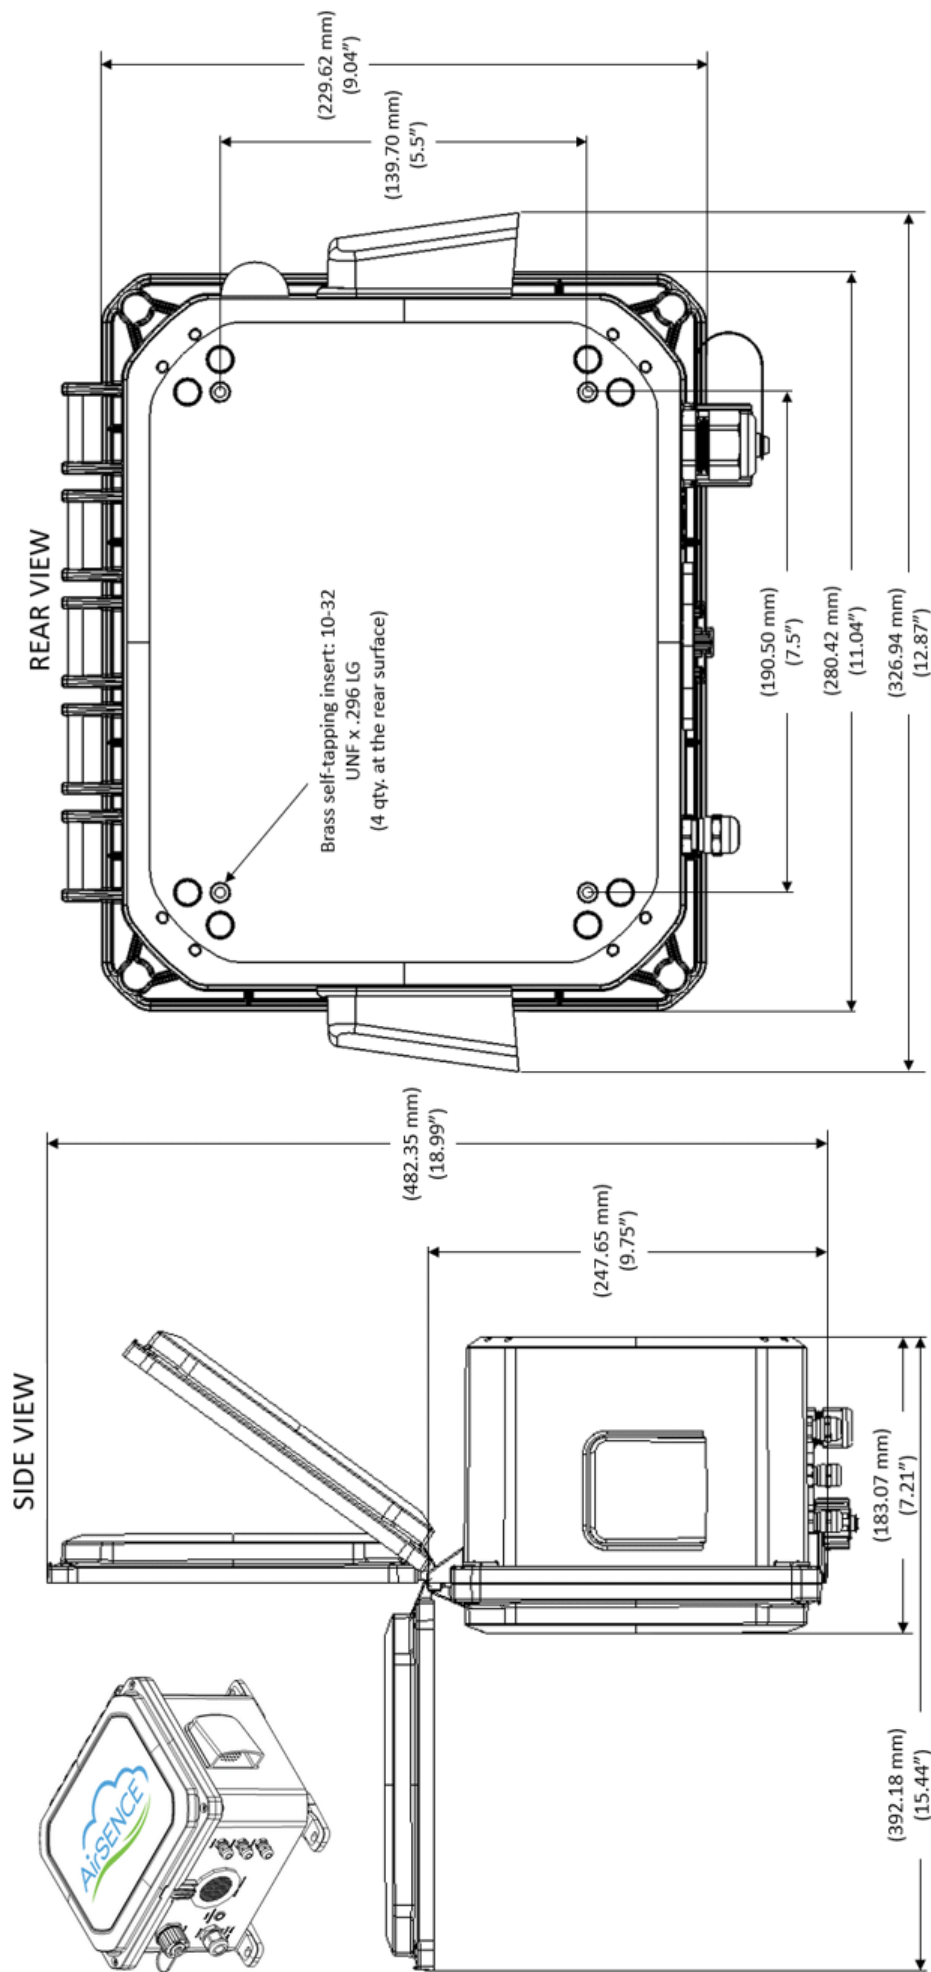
Important dimensions for AirSENCE installation, side view (left), rear view (right).
